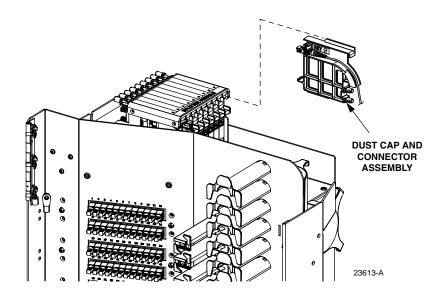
Inserting Dust Cap Assembly Into Splitter Compartment
